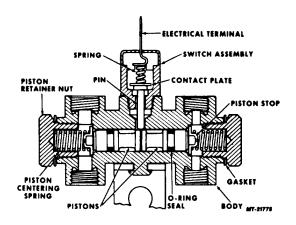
Cross Sectional View of Pressure Differential Valve.
